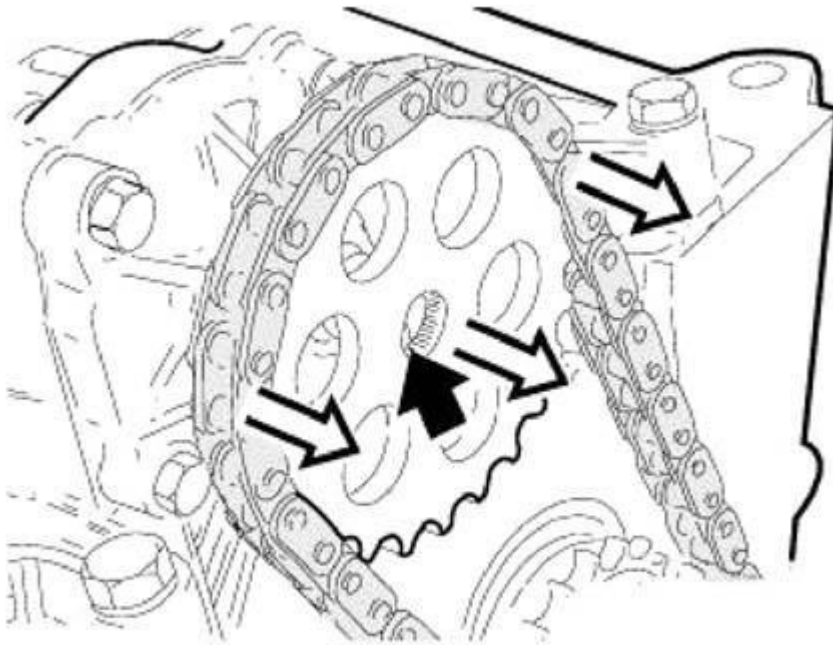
Unfastening NutCourtesy of BMW OF NORTH AMERICA, INC.*Installation:
